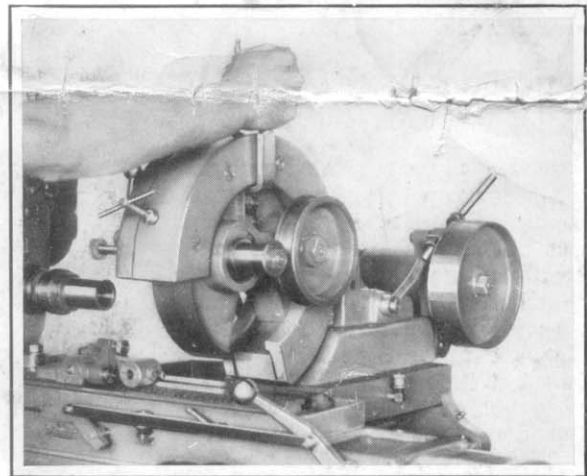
Turret Attachment showing drive pulley and manner of indexing either internal or external grinding spindle
